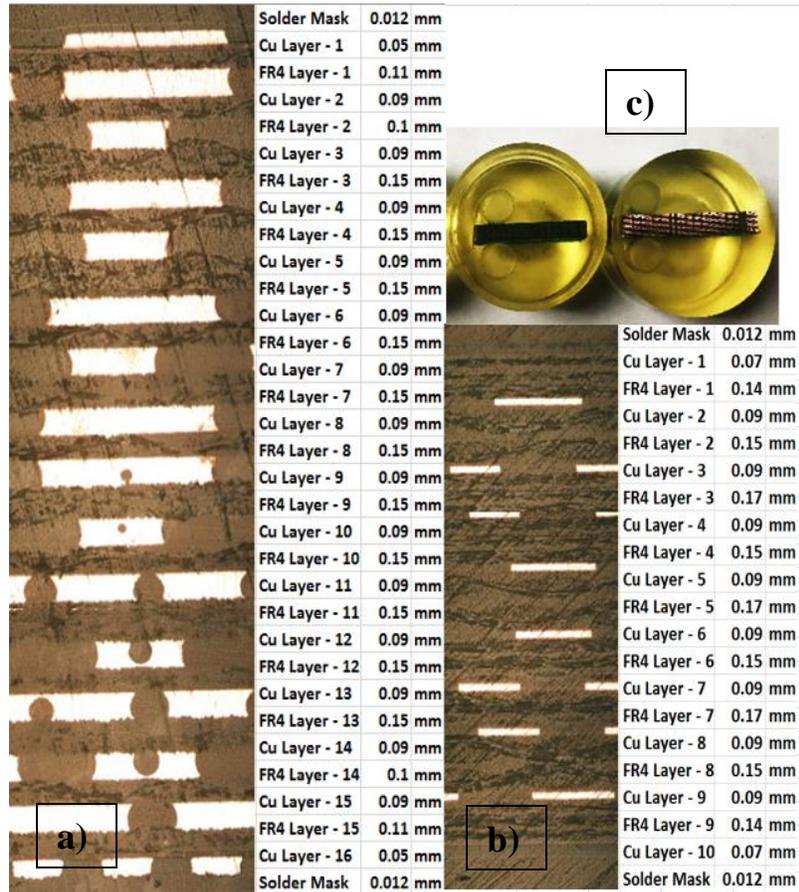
A) STACK UP DETAIL OF 134MIL BOARD. B) STACK UP DETAILS OF 93 MILS BOARD. C) EPOXY MOLD COMPONENT USED FOR CROSS SECTIONING
